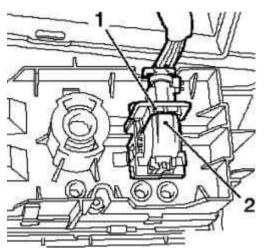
Removing the wiring harness connector module light switch: 1 - secondary fuse, 2 - fuse
